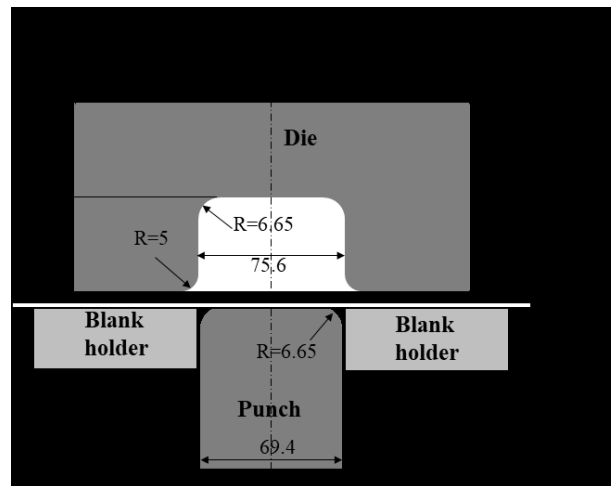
Schematic diagram of U-shaped components stamping tool set.
